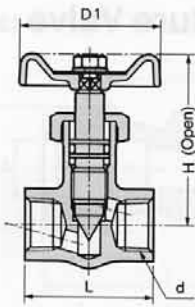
A 10K Threaded End Miniature Valve (Straight) mm
